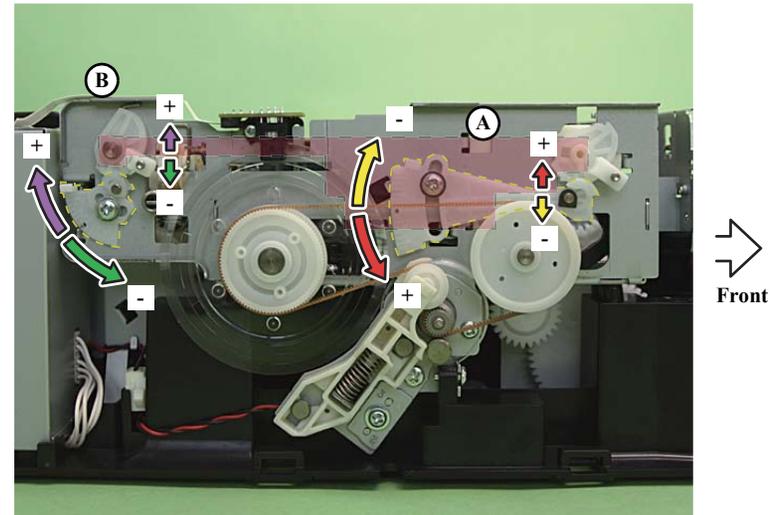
Operating the parallelism adjustment bushing (Left side)
